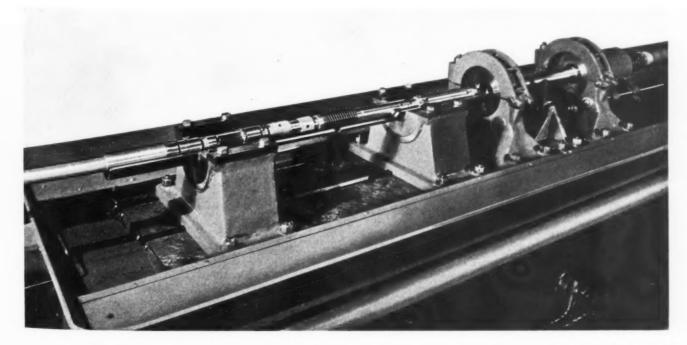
Honing Machines Employed for the Final Finishing of the Bore in Landing-gear Cylinders
